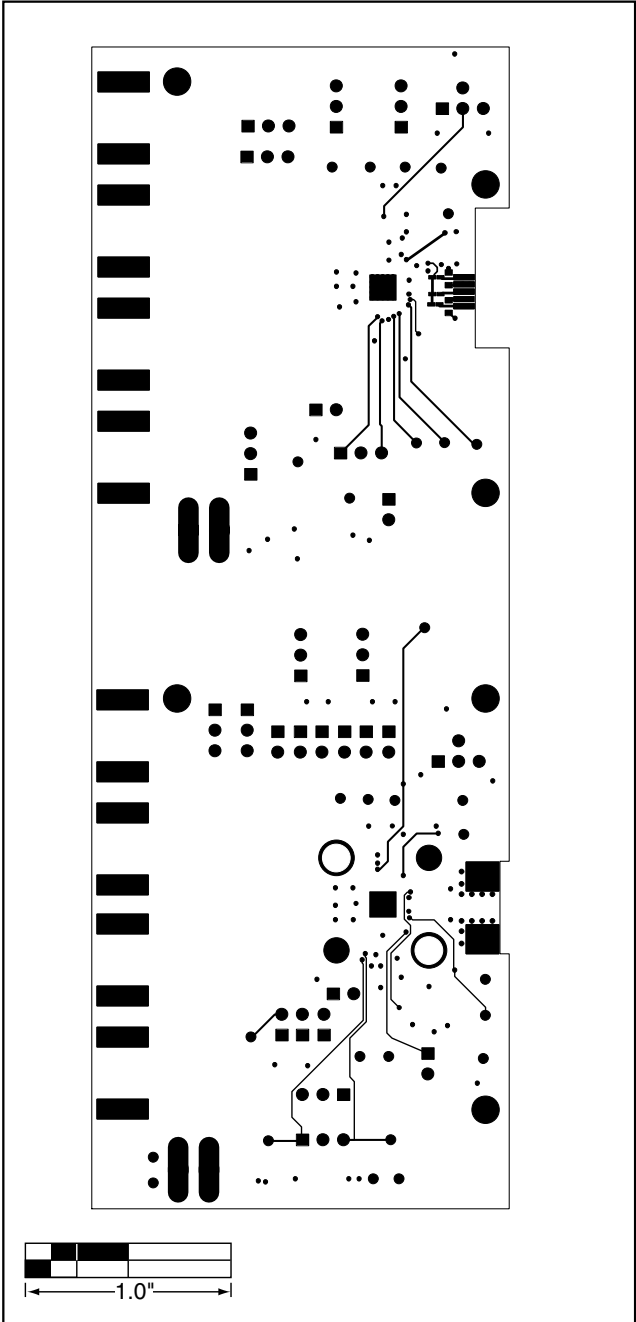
MAX3863 EV Kit PC Board Layout—Solder Side
